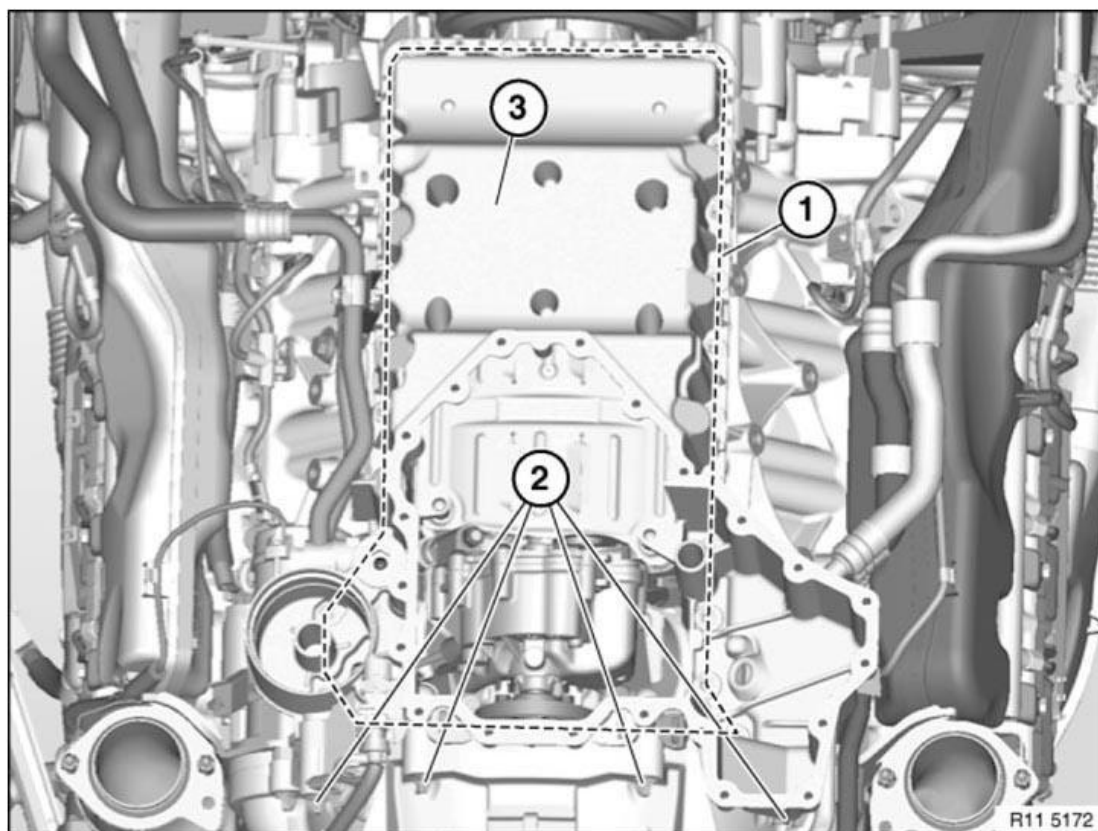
Identifying Transmission End Screws And Upper Oil Sump Section
